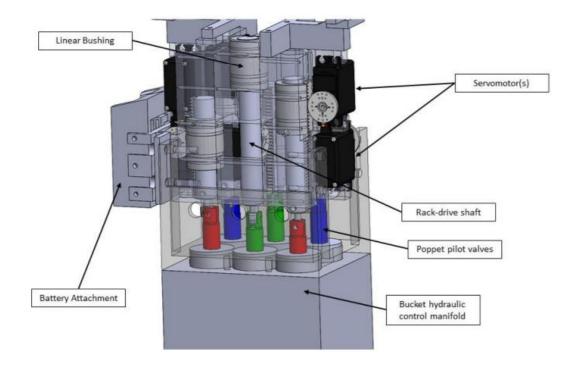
Expanded view of servo, rack and pinion, and hydraulic valve connections. (Marklin et al., Electrical Power)
